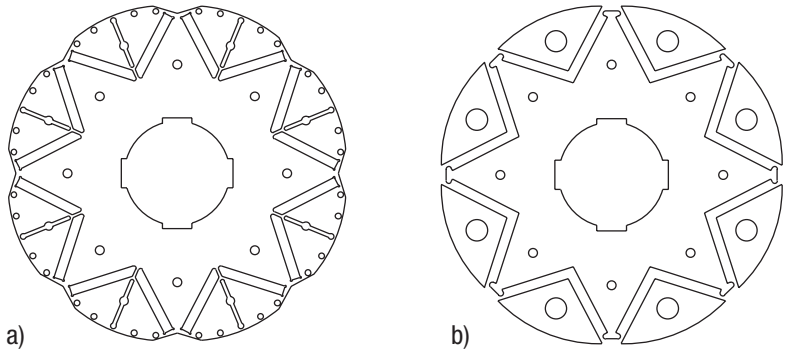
Rotor constructions of the permanent magnet generator made of a) 0.5 mm thick electrical steel and b) 10 mm iron sheets.
